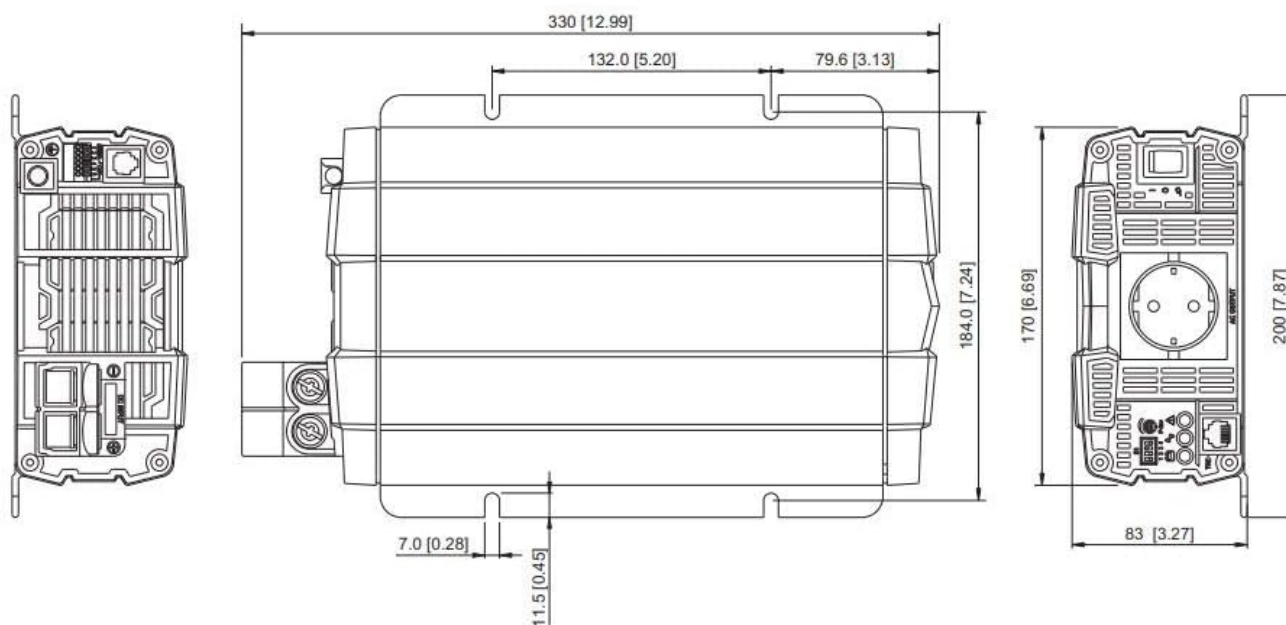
Mechanical drawings providing dimensions and mounting details for the SP-700 series inverters.
